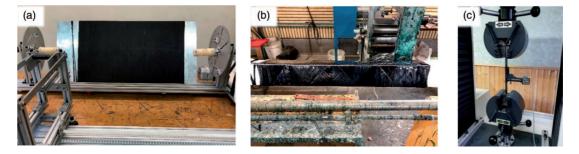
A schematic of the fabrication process of the FW composite specimens (a) Manufacturing of flat specimen, (b) Manufacturing of square-section samples, and (c) Tensile testing.
